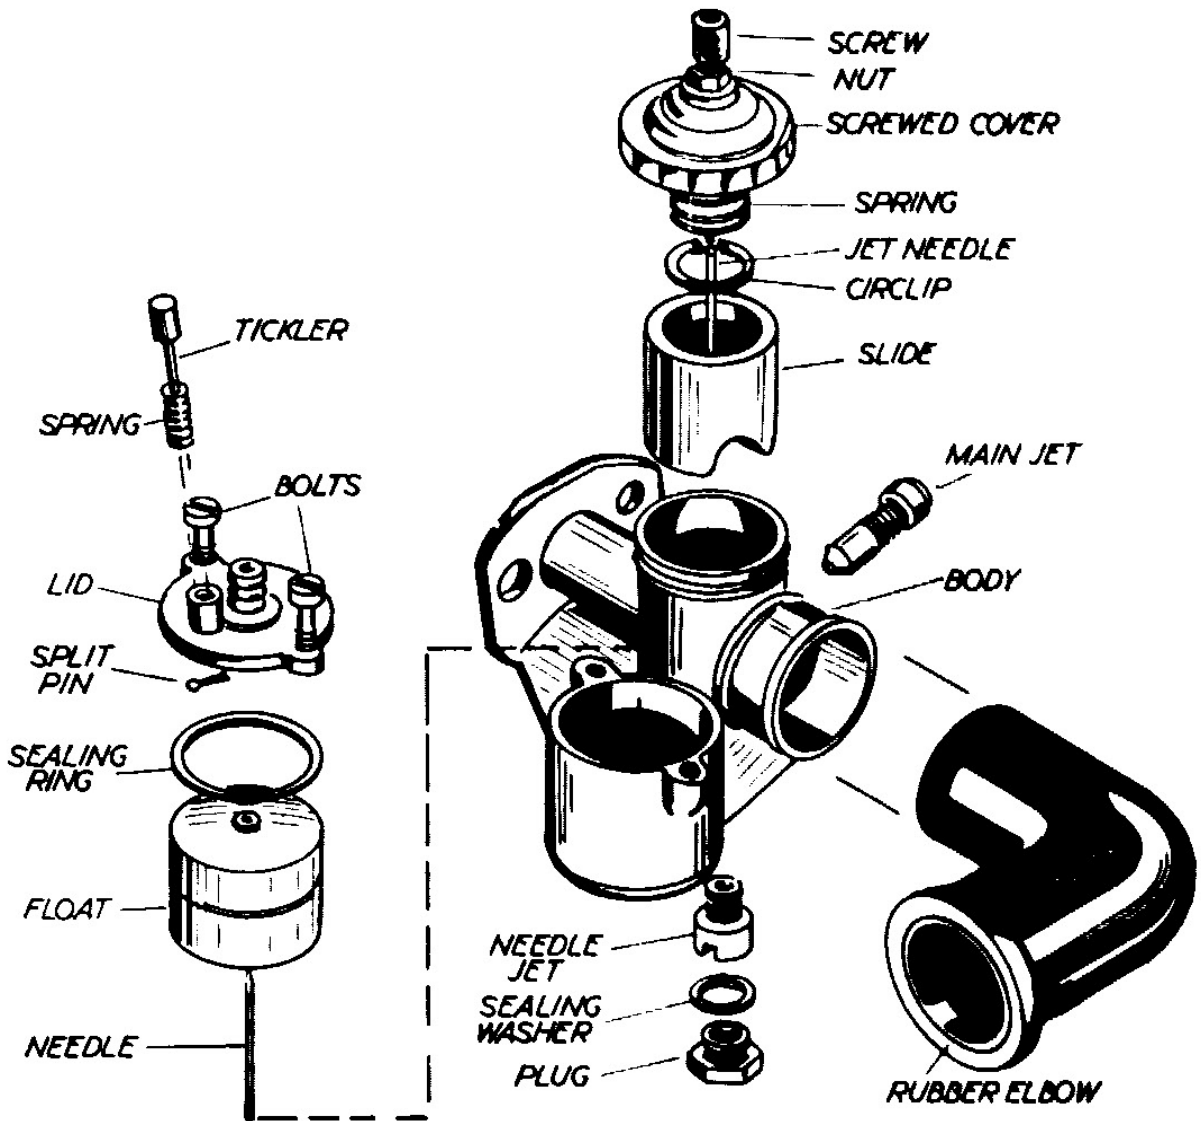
AN EXPLODED VIEW OF THE CARBURETTOR SHOWING ALL PARTS
